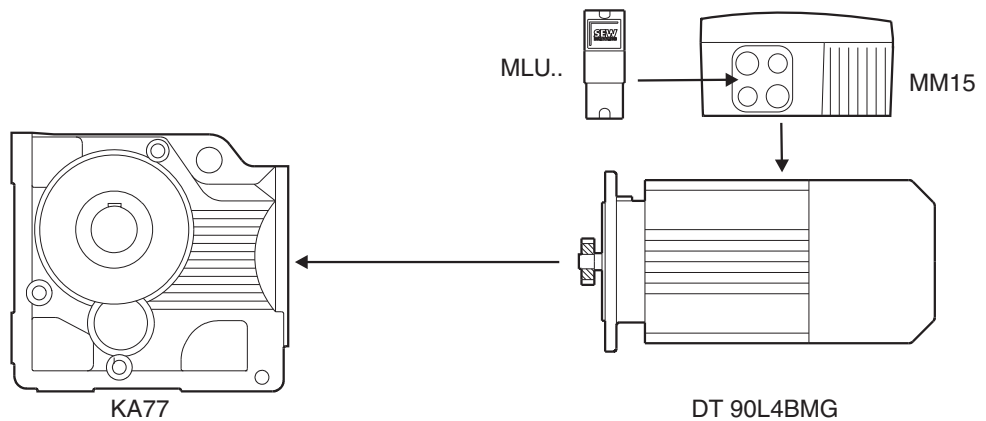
Example for the unit designation of a MOVIMOT® gearmotor
